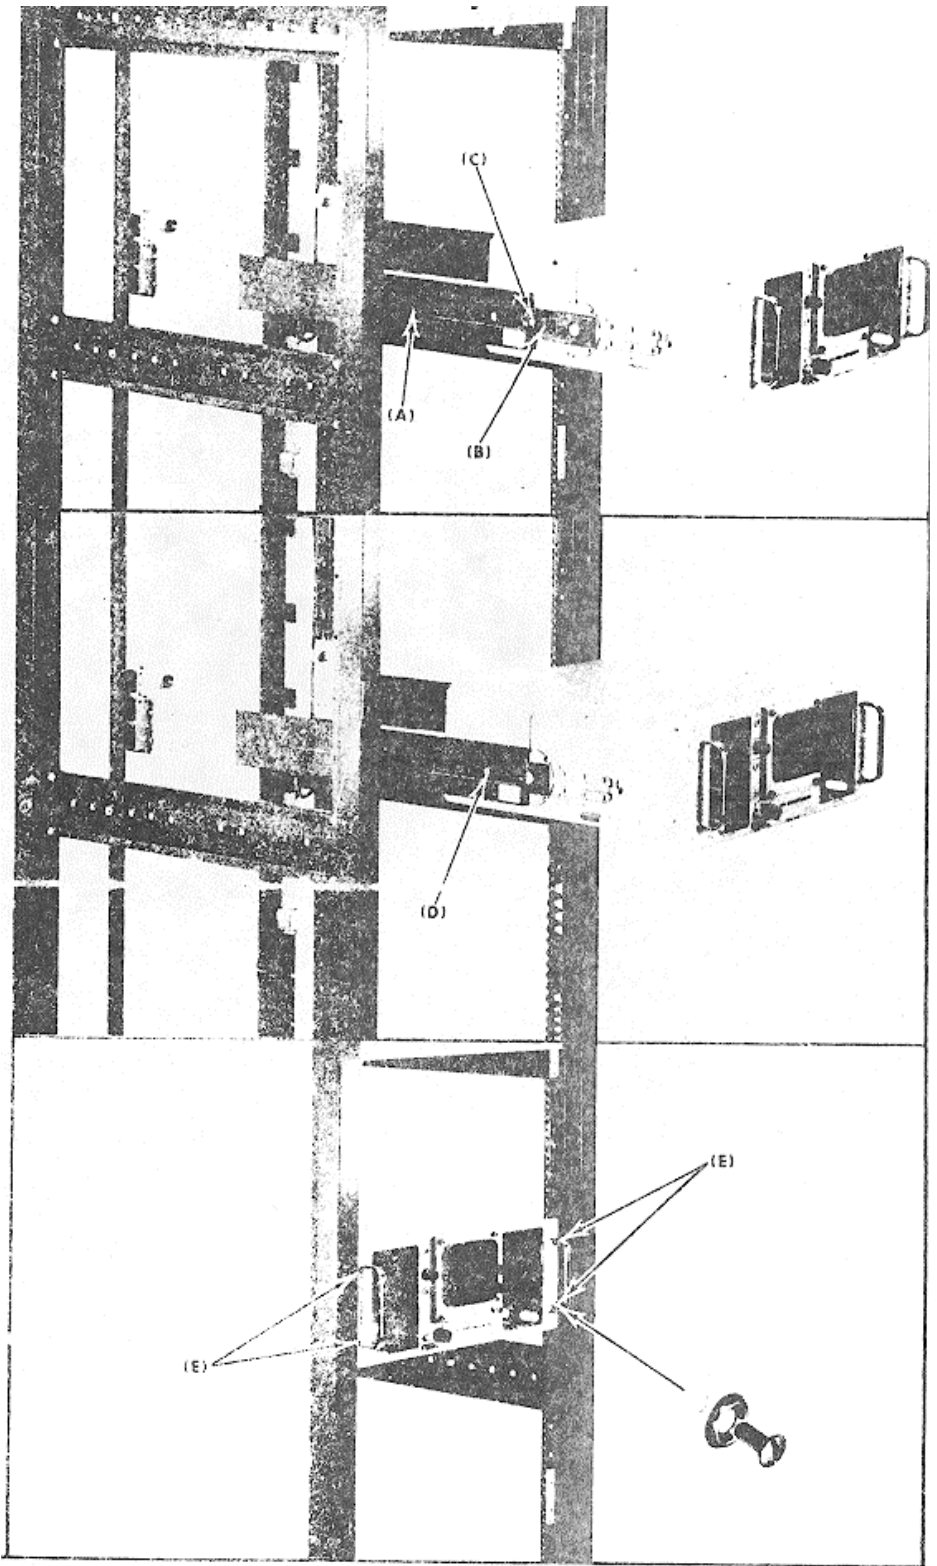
Insertion and removal of the instrument after the slide-out tracks have been installed.
